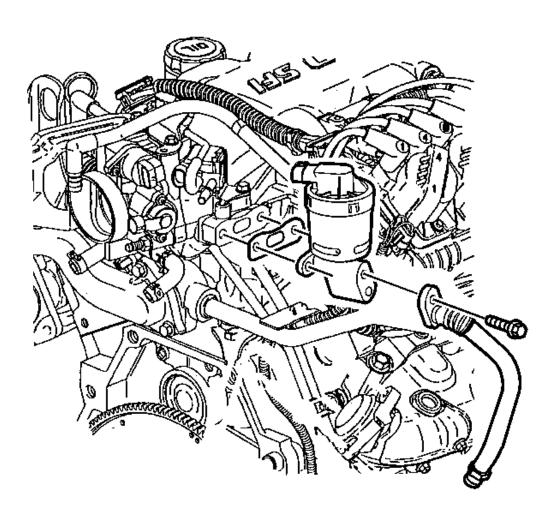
Removing EGR Valve & Gasket Courtesy of GENERAL MOTORS CORP.
